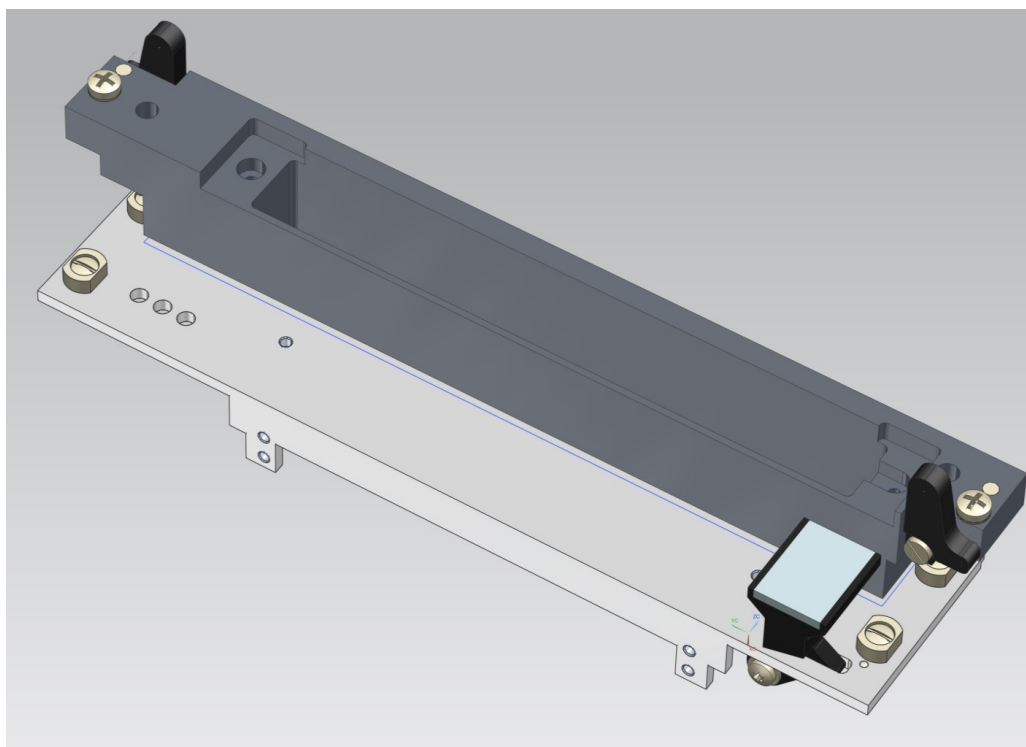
Assembly tool TSVP/VPC-RCV 5029.1713.00
